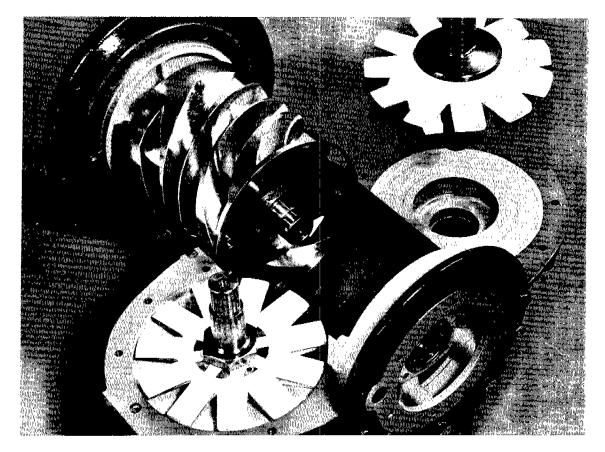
Exploded View of a Zimmern Single Screw Compressor
